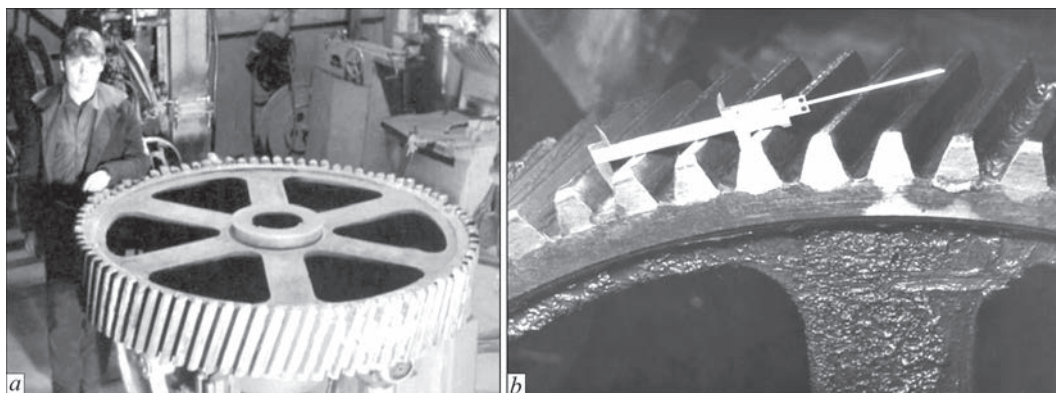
Appearance of the restored gear wheel after heat treatment (a) and mounted in the rotation drive of a debarking drum (b) after mechanical treatment of the clad teeth (b)
